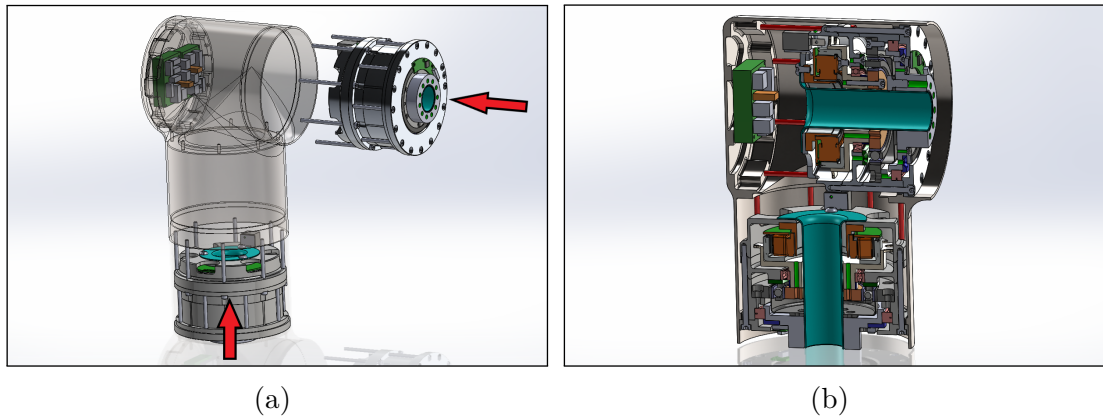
(a) Exploded view of robot 2-DOF shoulder joint; Size-90 drives are inserted axially. (b) Detailed section of shoulder: drives are fastened to casing through red screws and powered by onboard controllers; wiring passage is ensured by hollow design.
